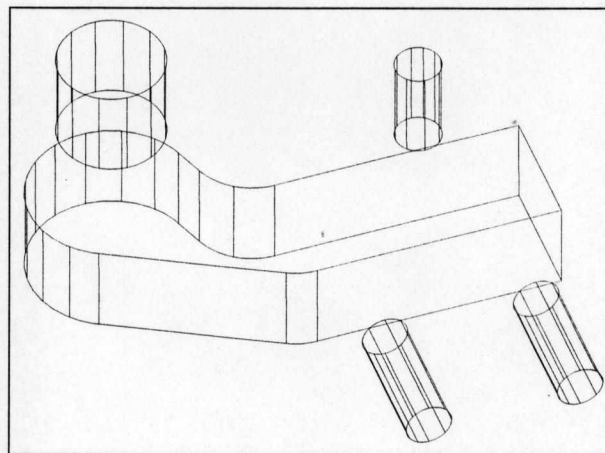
Exploded view of the features making up the reverse engineered steering arm.
